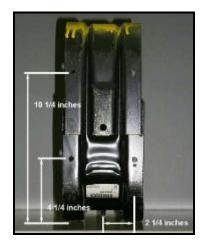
Position of holes to be drilled in the tank mounting brackets.
